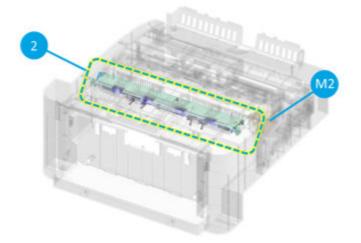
Inner finisher system - paddle unit driving system detail view (1/2)
